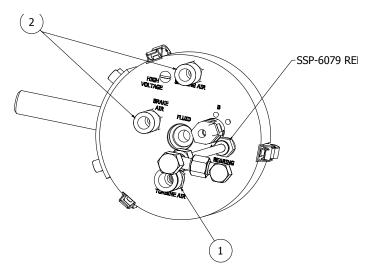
CCV Mounting Manifold Fitting Selection (Metric/Fractional)
